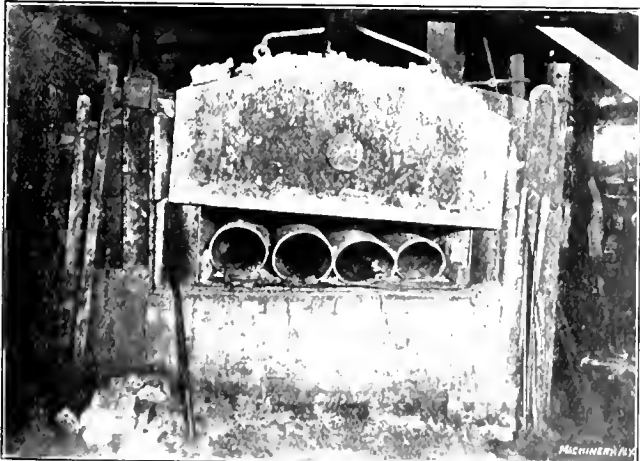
One of the Annealing Furnaces, showing the Pipes into which the Tool-steel Bars are placed while being heated for annealing
